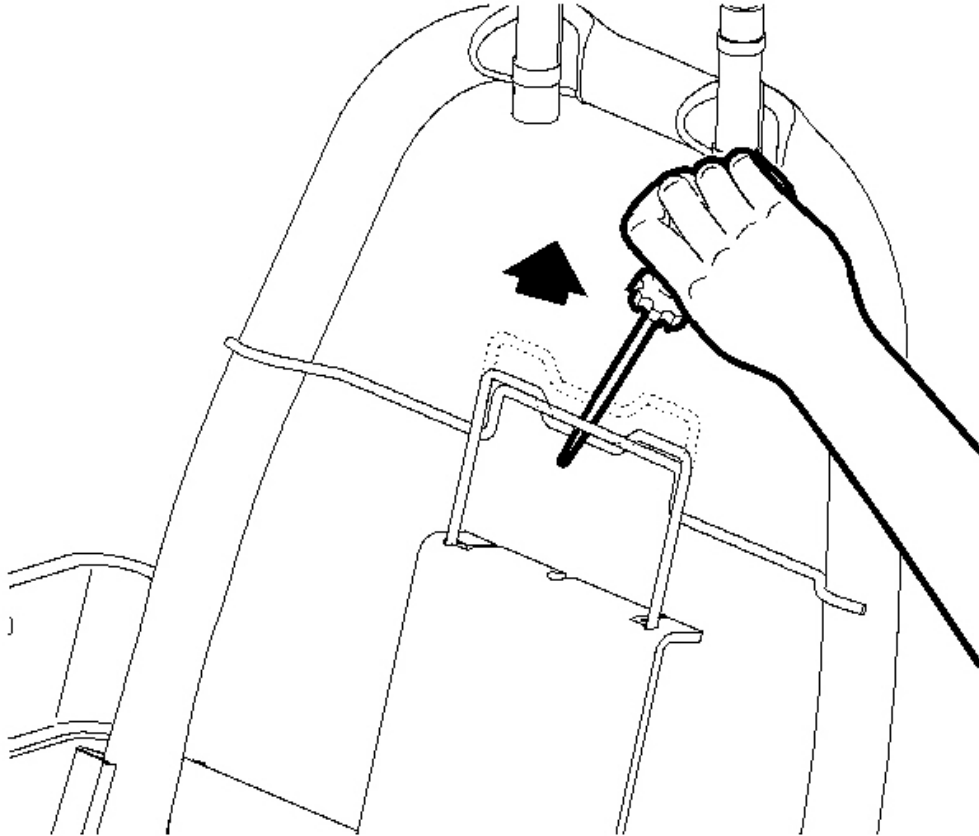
Twisting Lumbar Unit Using Flat-Bladed Tool
